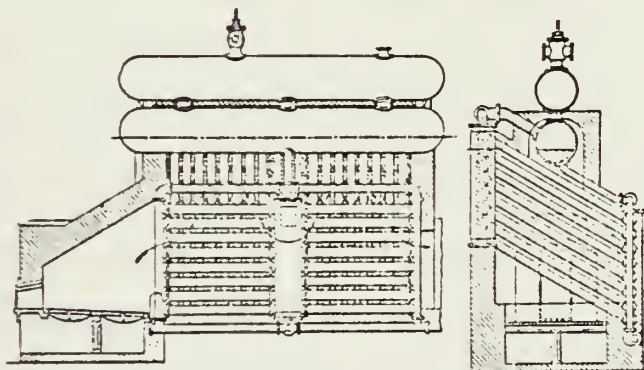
FIRST SECTIONAL WATER-TUBE BOILER WITH INCLINED TUBES - TWBILL - 1865
